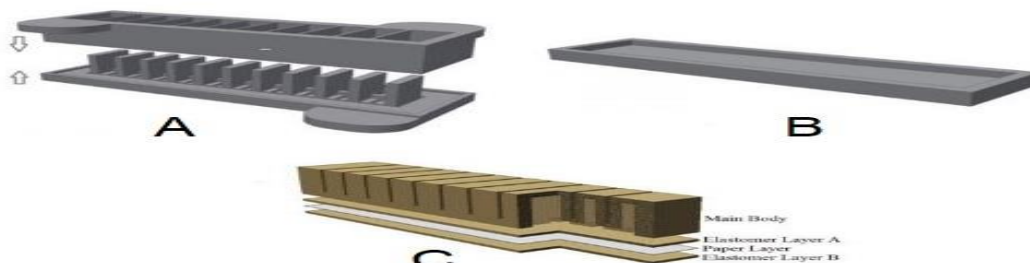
Overview of design process [18] (A) Two part mold for air chamber (B) Base mold for sealing the air chamber (C) actuator design parts.
